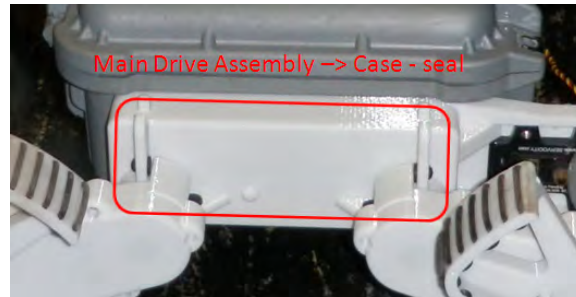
The case seal is located between the Main Drive Assembly module and the Pelican case.
